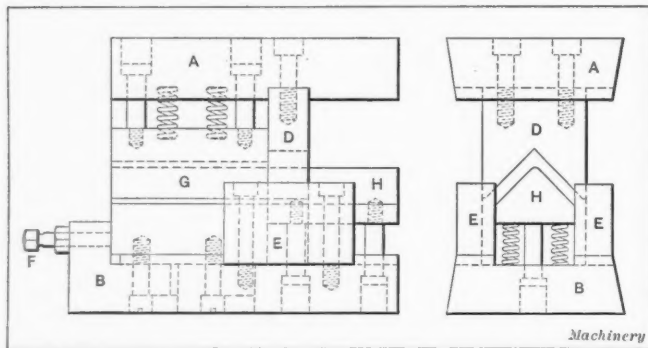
Side and End Views of Shear for cutting Angle Irons
